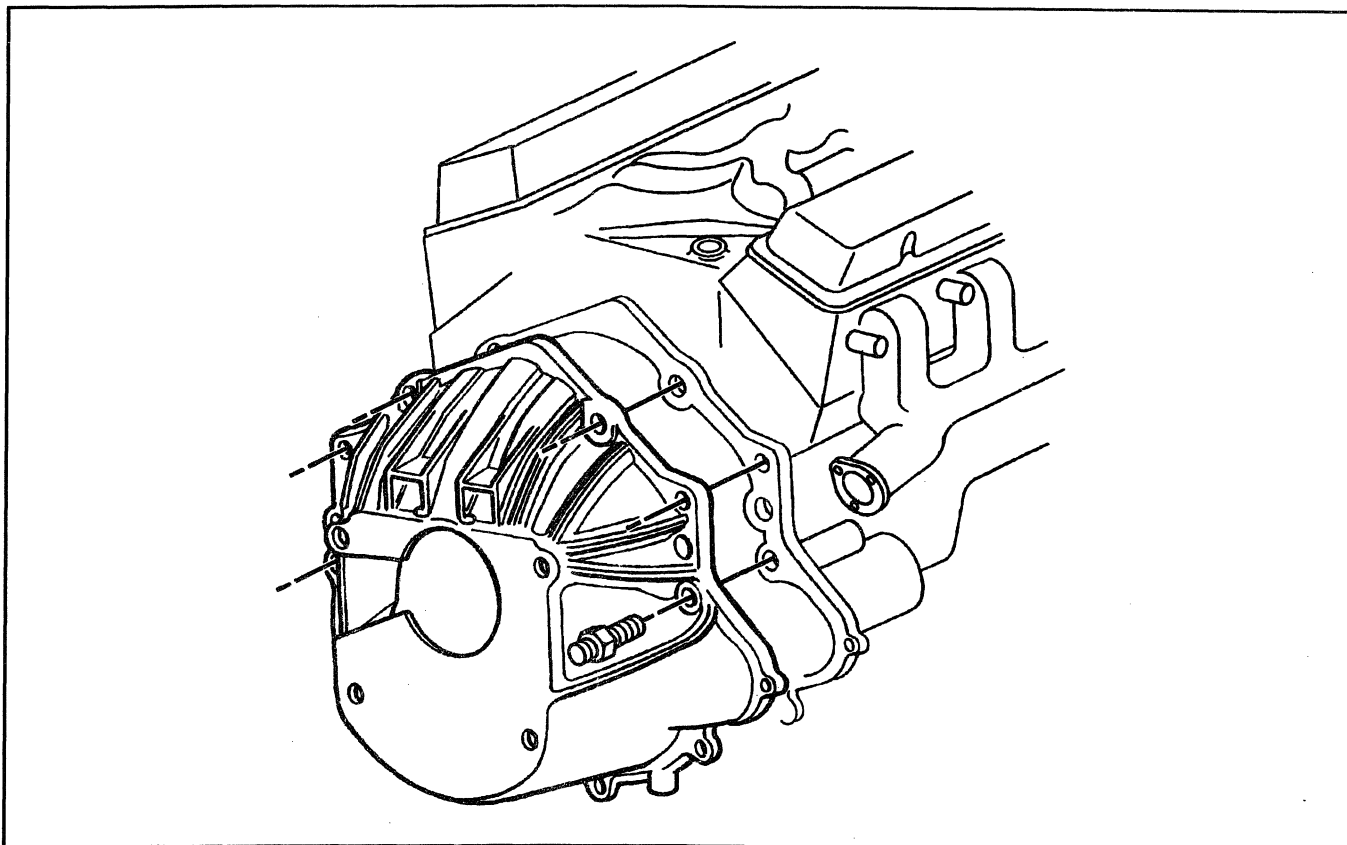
Clutch Housing to Engine (New Venture Gear 4500)
